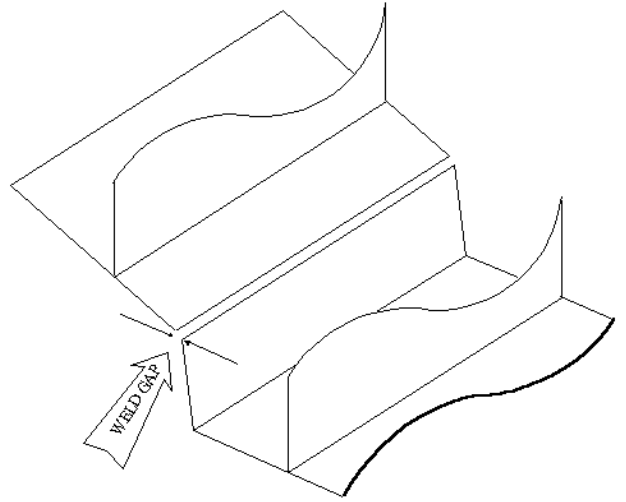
Weld Gap Location For Joining Assemblies
